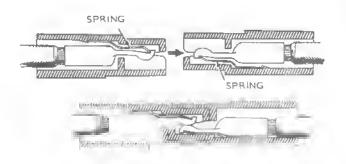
CONNECTOR HOUSING AND TERMINAL CONNECTION DETAILS
